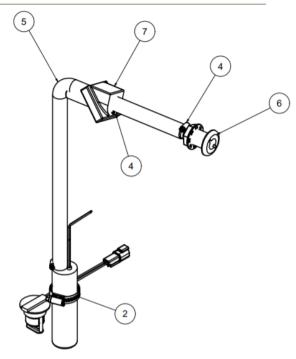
Right isometric view of the bilge pump assembly, which shows the 1.25" clamp (2), 5/8" clamp (4), flex hose (5), and hull fitting (6).
